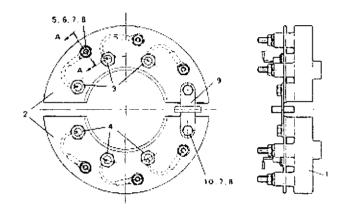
ROTATING RECTIFIER ASSEMBLY
